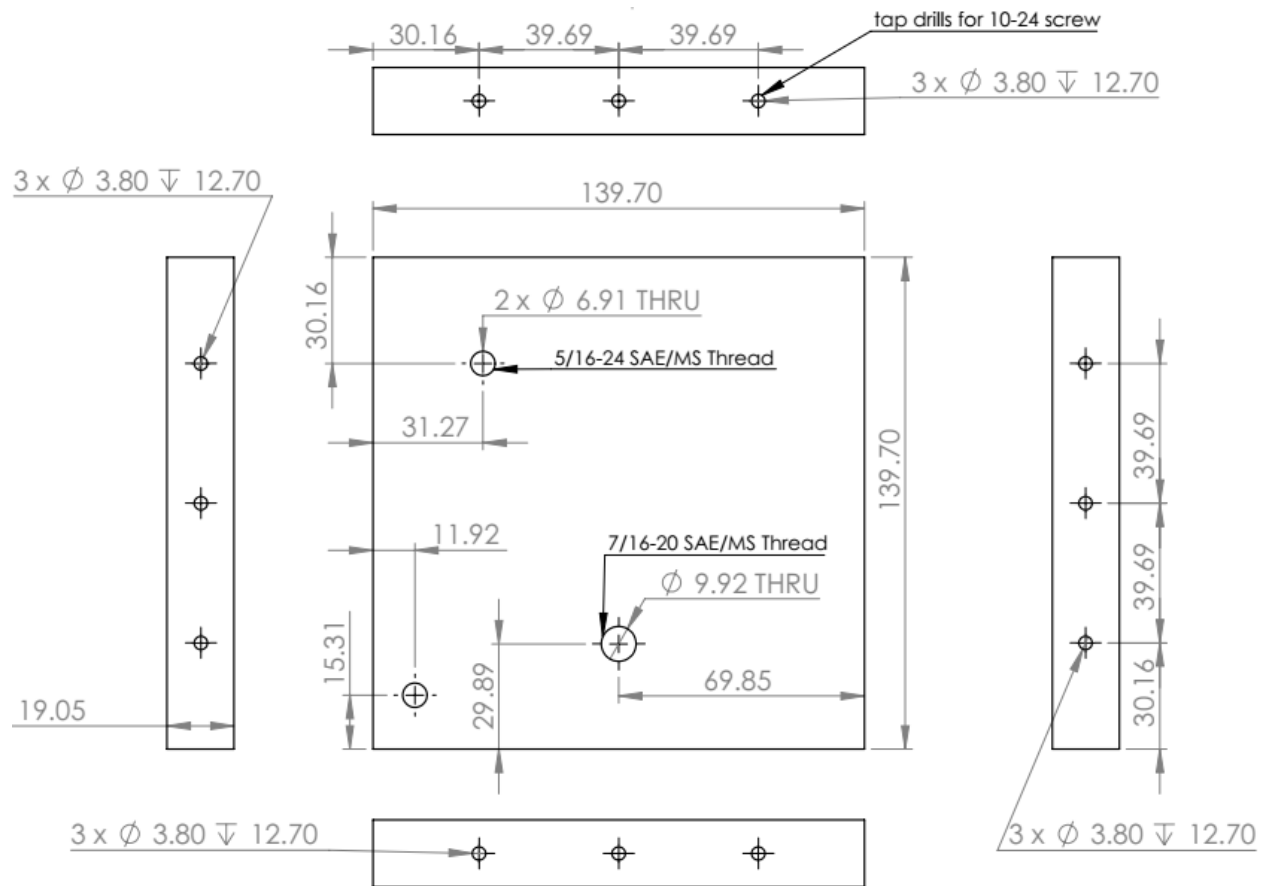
Technical drawing of the chamber side wall, made from PEEK. All the dimensions are in millimeters.
